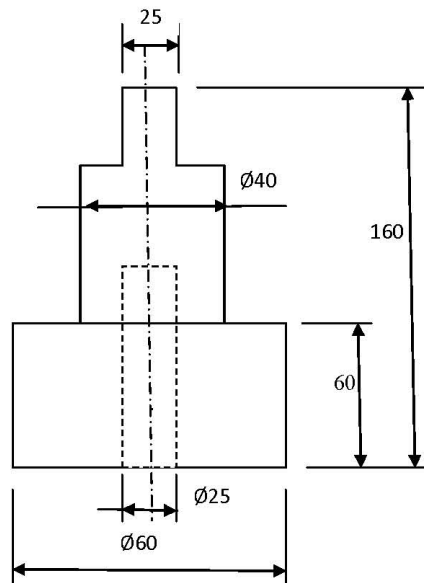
Fatigue test gripper adaptor for the UoN axial load machine
